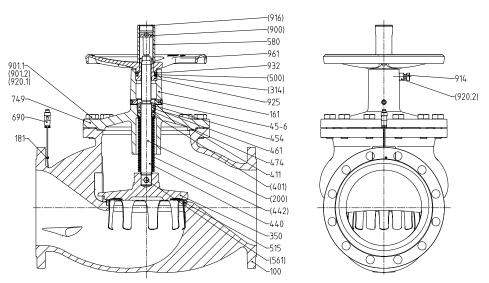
Sectional drawings of BOA-Control/BOA-Control IMS, type BOA-H, DN 250 - 350
